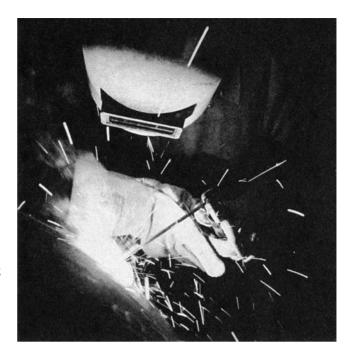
Shielded metal arc welding (stick welding) performed by a (human) welder. (Photo courtesy of Hobart Brothers Company.)
